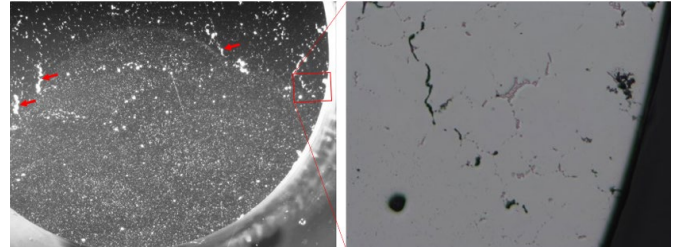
A206 + 30 ppm B showing cracking/melting near the weld interface.
